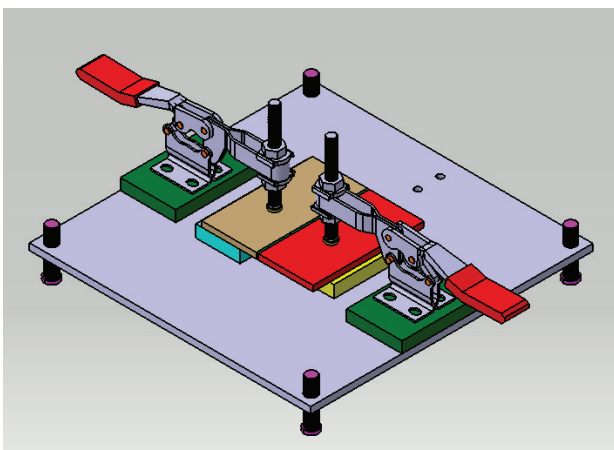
Designed Welding Fixture: Butt Joint
